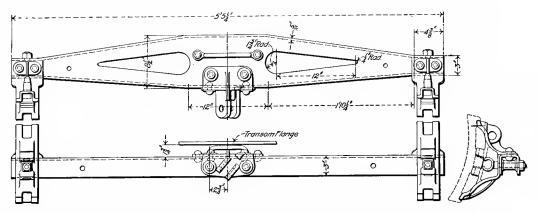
Pressed Steel Double Truss Brake Beam. Pressed Steel Car Company.
